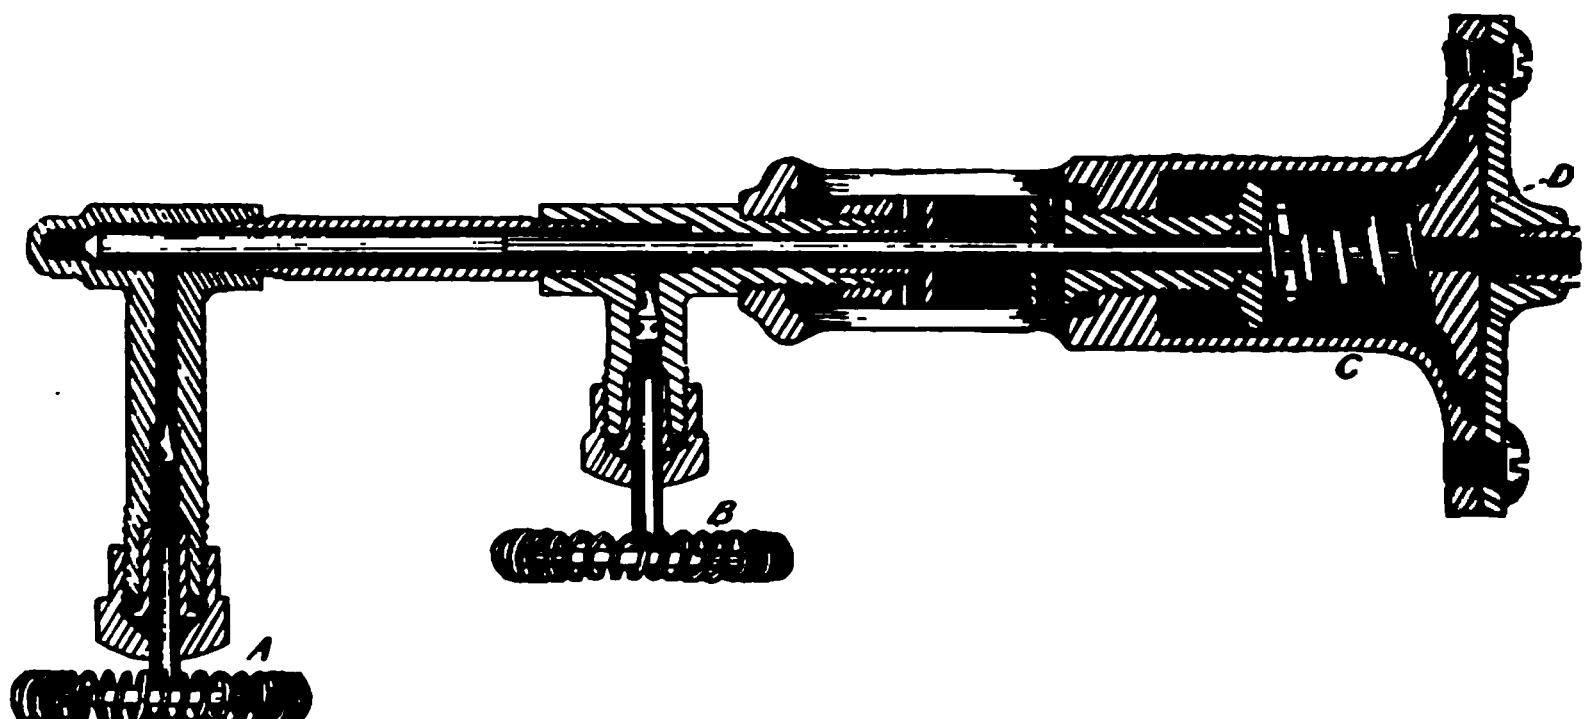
Fuel Feed Regulator of a Steam Carriage Burner, intended for Use with "Torch" Burner Kindler or Auxiliary Vaporizer. A is the hand wheel and needle valve regulating the feed to the main burner; B, the hand wheel and valve for operating the torch; C, the spring and header attached to the main valve rod; D. the diaphragm against which steam bears, regulating the main valve according to pressure. The liquid gasoline is admitted at a port on the left-hand extremity of the regulator tube, near the end of the needle valve on the main rod.
